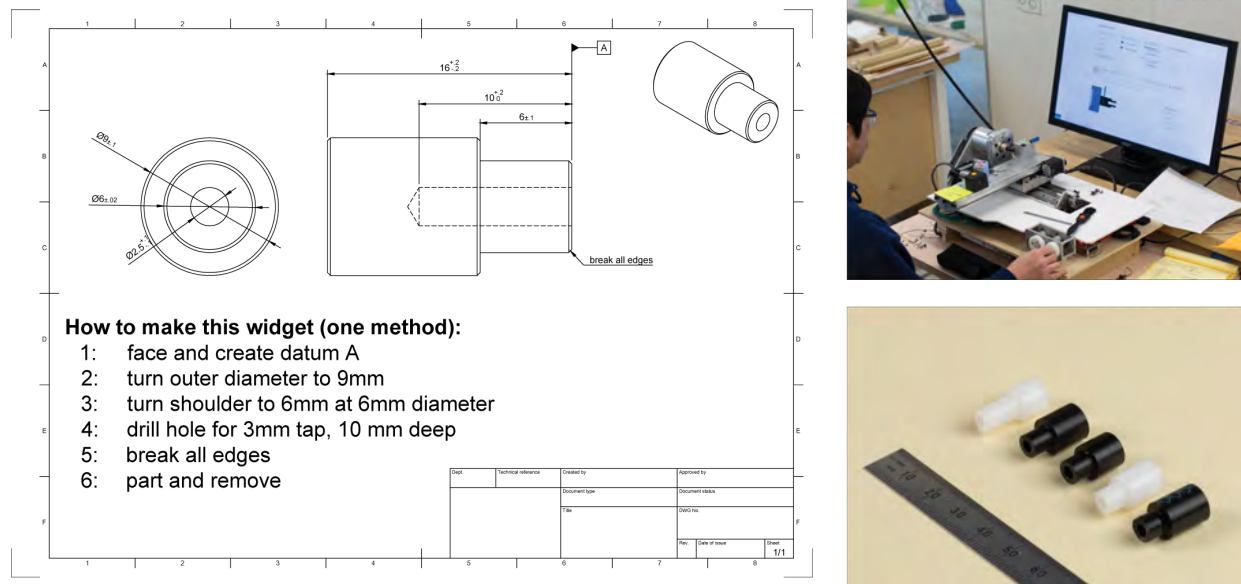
Left: Dimensional drawing given to users during the study. Many of the primary operations possible on a lathe are required to fabricate this component. By design, users also encounter all haptic features while fabricating this component. Top right: User study setup with lathe, handwheels, and monitor to display the GUI. Bottom Right: Widgets made by the five users during the user study. We suggested to the participants to focus primarily on familiarizing themselves with the tool and haptics, rather than achieving perfect dimensions for the outcome.
